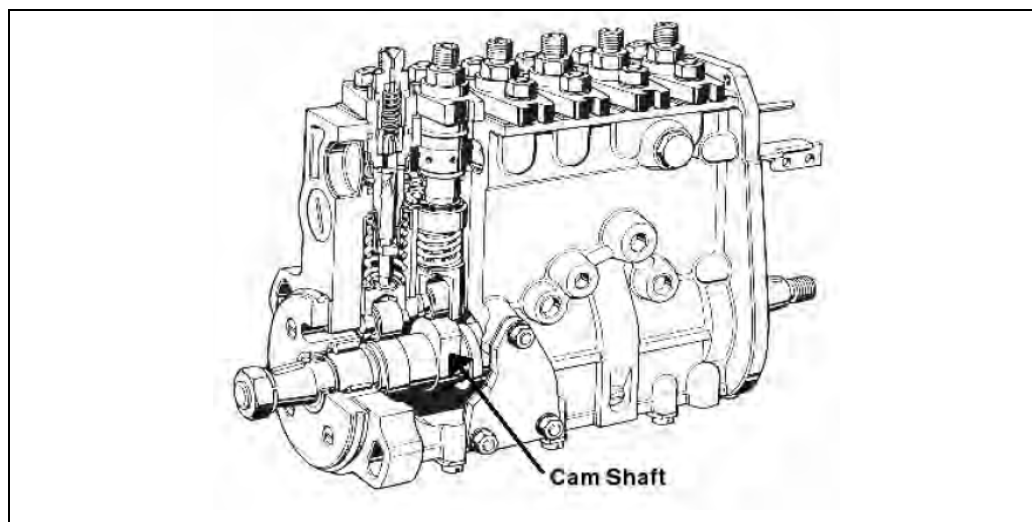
Inline Injection Pump Each Cam Lobe Drives A Piston As Shown In This In-Line Type Injection pump
